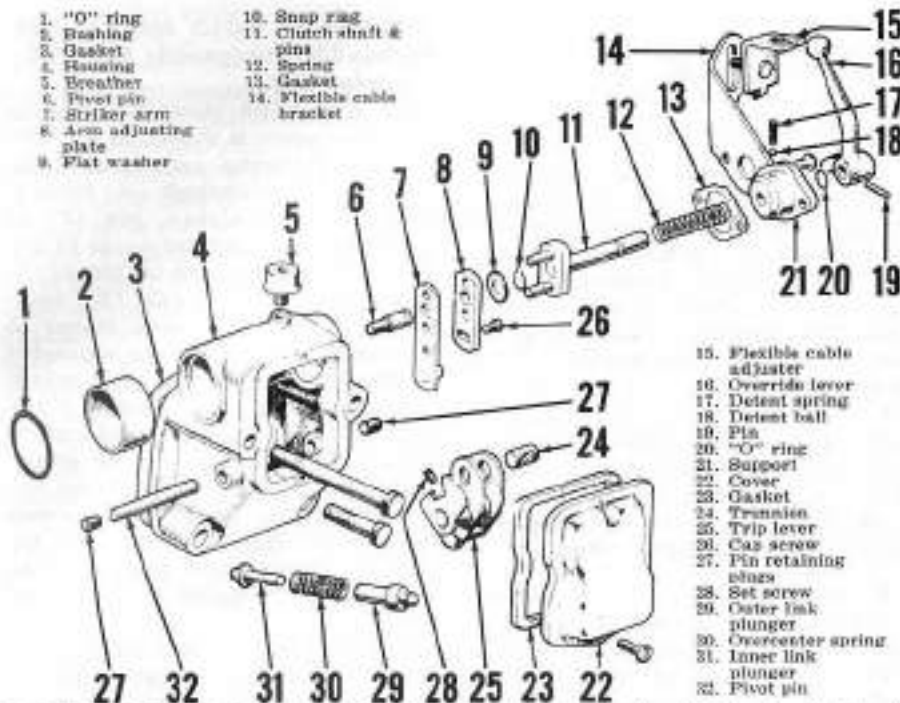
Exploded view of automatic hold mechanism. Housing (4) is also right hand support for rockshaft; rockshaft bushing is (2). Pivot pin is pressed into right end of rockshaft (see 11—Fig. 159).
